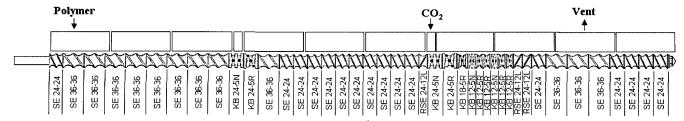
Schematic of screw configuration of a co-rotating twin screw extruder.
